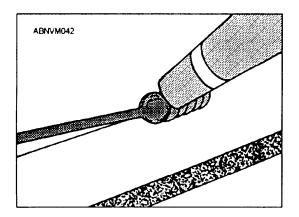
Correct position of the welding torch and proper addition of the tiller metal to form a weld pool.
